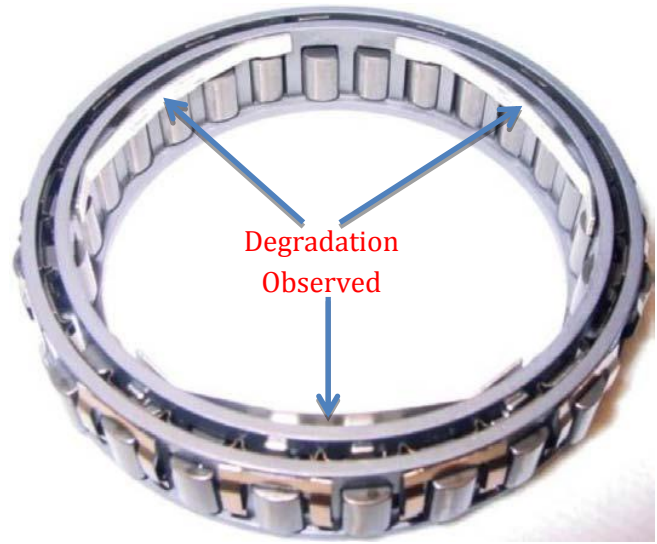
Transmission Accessory Gearbox Sprag Clutch
